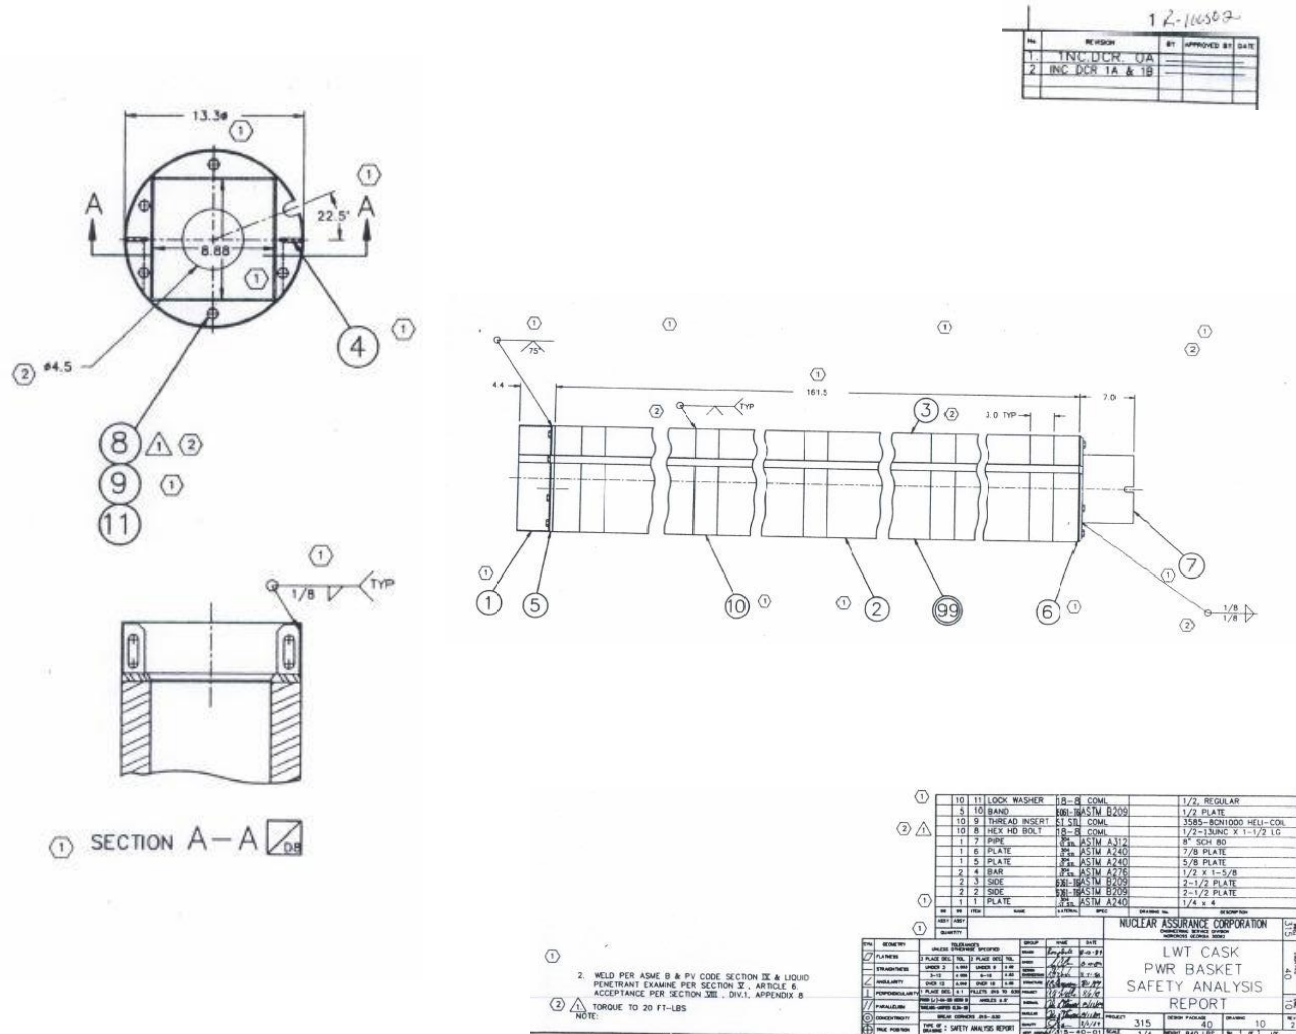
Dimensions of basket to be used to contain the assembly on the shaker (Safety Analysis Report for the NAC-LWT, Revision 27, June 1999, Docket No. 9925 T-88004).
